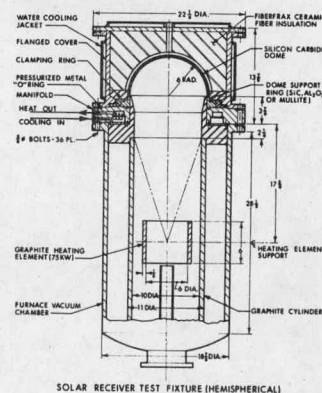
Cross-sectional view of the seal test unit and radiant furnace
